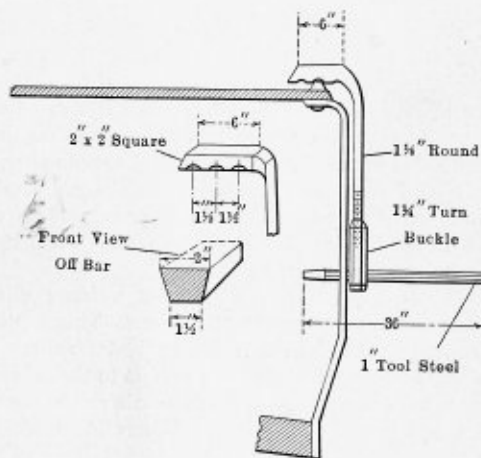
Adjustable Holding-on Bar for Holding on Rivets in Back Flue Sheet
